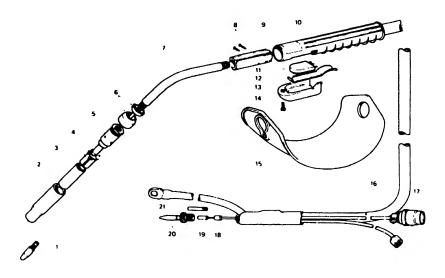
(f) Welding torch with air motor for wire feed drive built into the handle. Speed of motor is set by means of a knob which controls an air valve Guns can be fitted with swan necks rotatable through 360. Available in sizes up to 400 A, these latter have a heat shield fitted to protect the hand. A fume extraction unit is also fitted.
